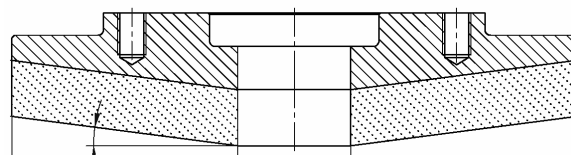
Rotary calibrating head (with conical inclined satellite tools)
